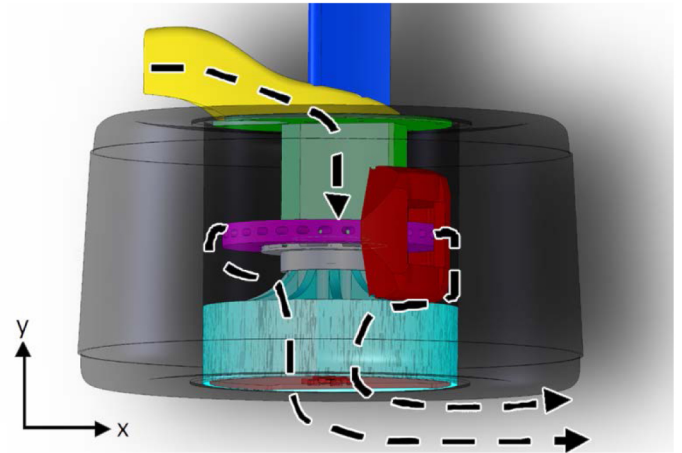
Common F1 front wheel assembly geometry and suggested through-hub flow pattern.
